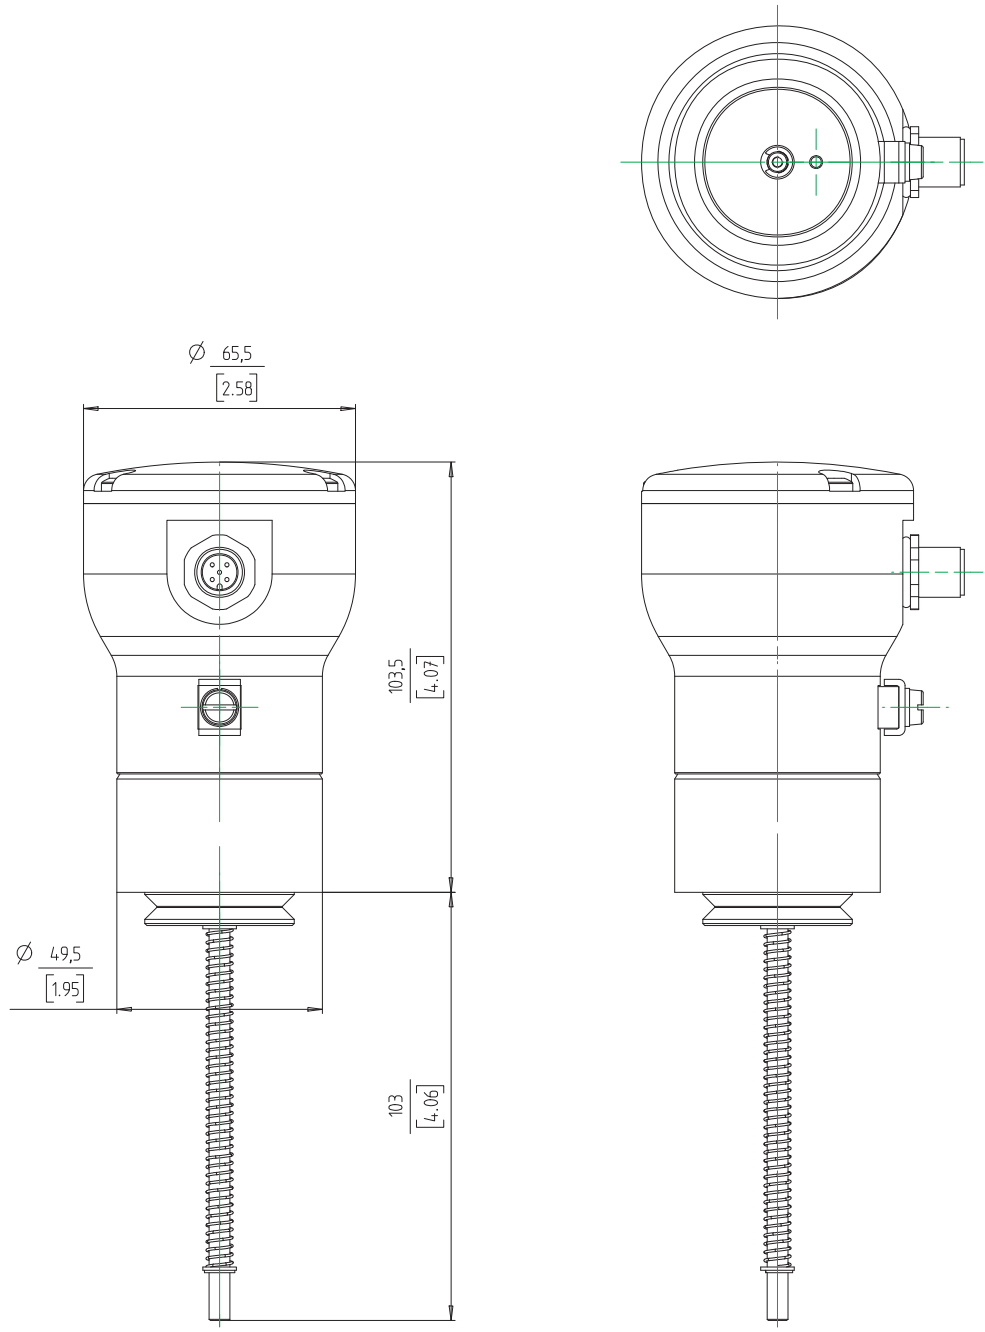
DIMENSIONS for TOP MOUNTING, Code W
